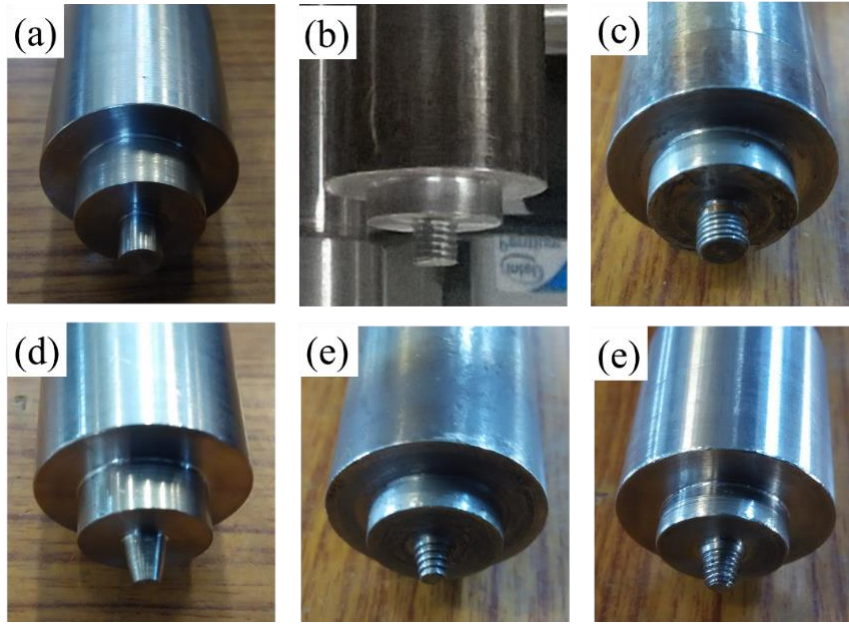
(a) Straight cylindrical pin tool C, (b) Straight cylindrical square thread pin tool CS, (c) Straight cylindrical V-thread pin tool CV, (d) Taper cylindrical pin tool T, (e) Taper cylindrical square thread pin tool TS and (f) Taper cylindrical V-thread pin tool TV.
